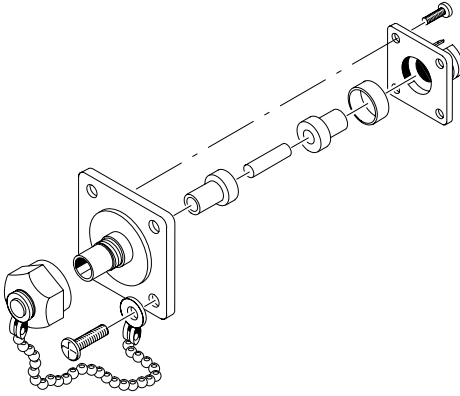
DIN 47256 Optical Bulkhead Assembly
